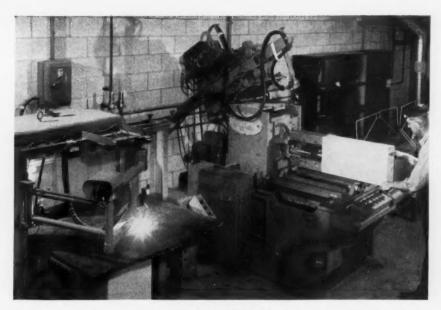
View of CSO oil switch assembly turntable equipped with four assembly fixtures.
